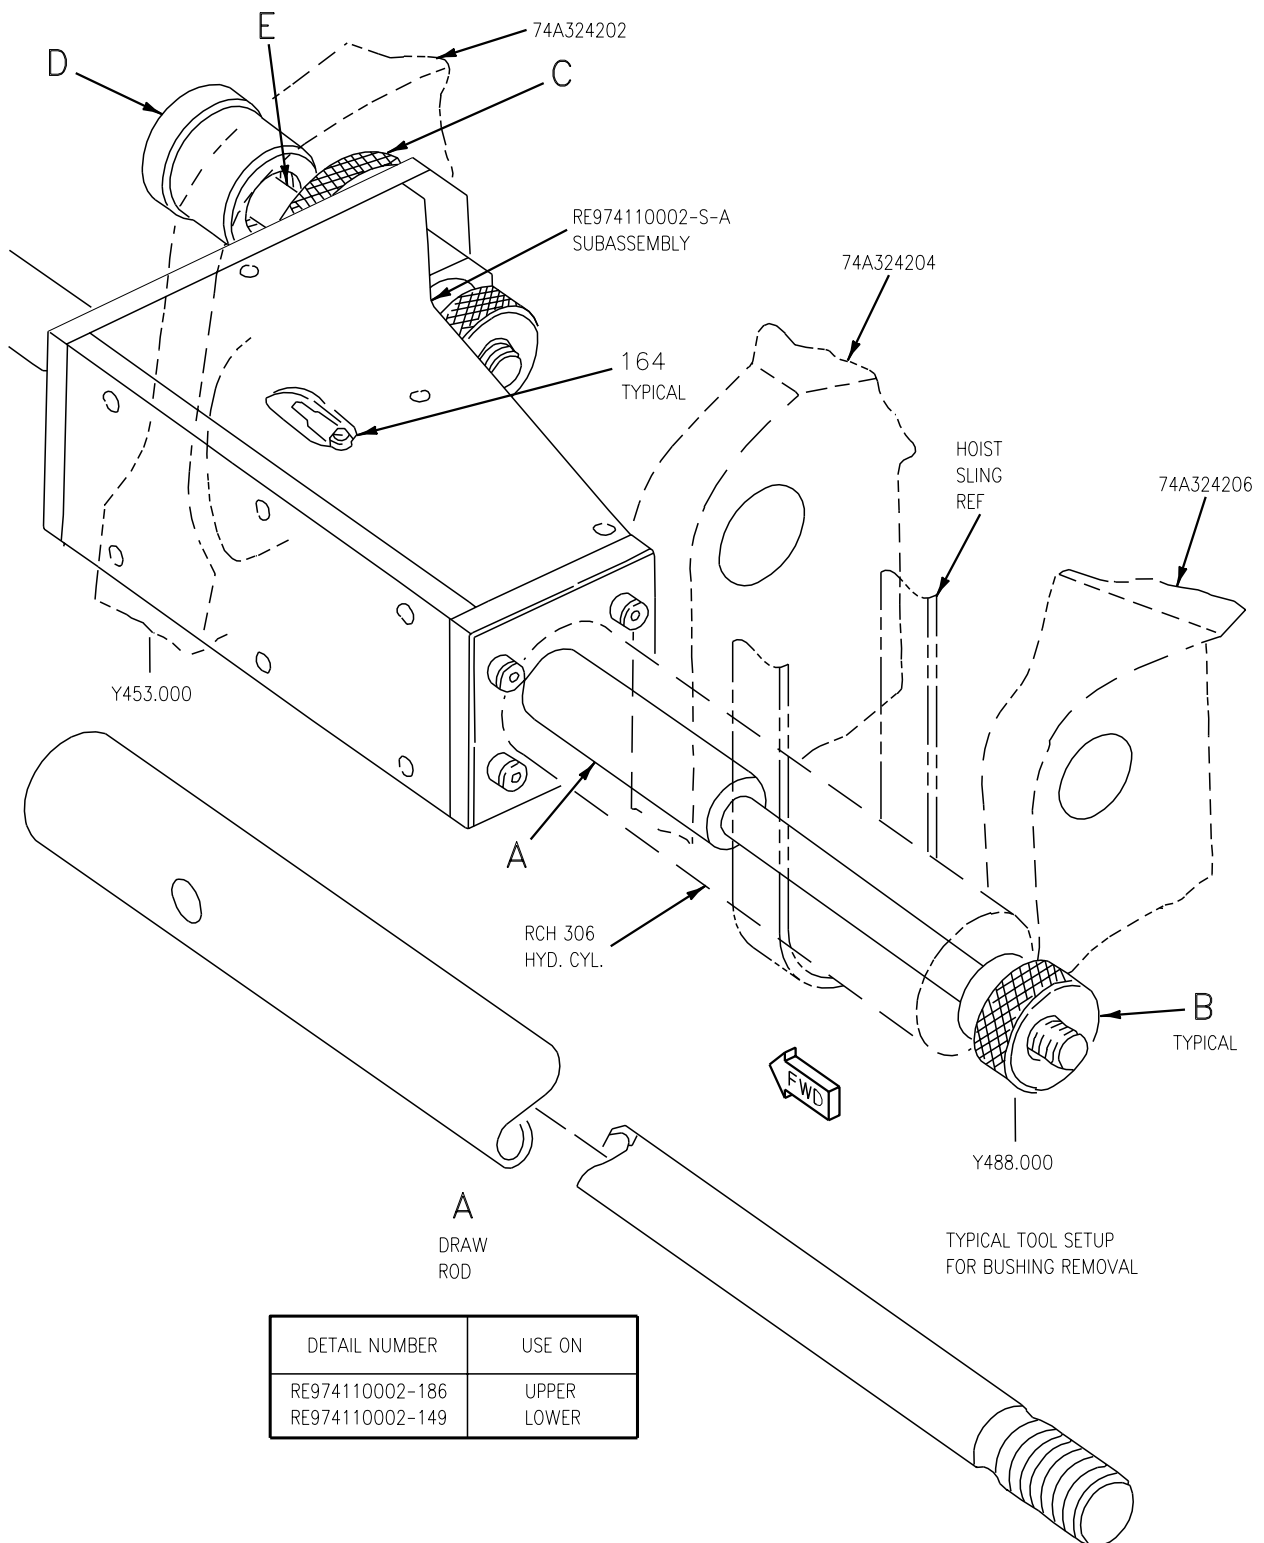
Wing Lug Bushing Installation (Sheet 3)
